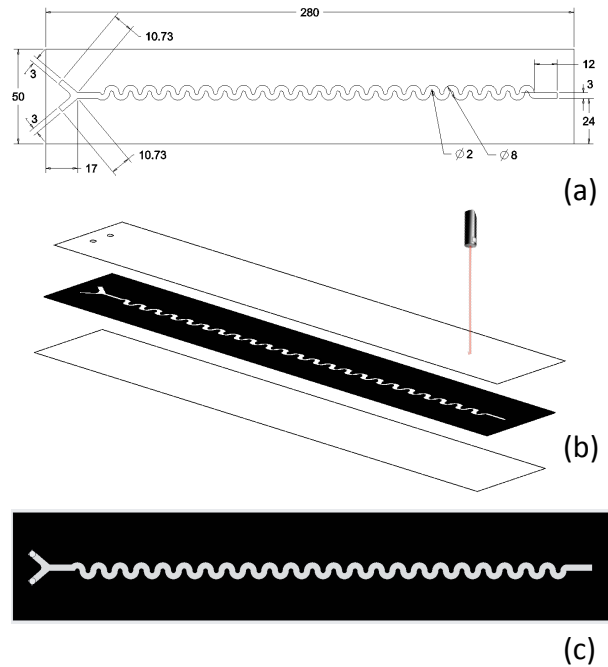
Schematic of the test section: (a) dimensions of the serpentine channel (in mm); (b) schematic of the laser welding process; (c) assembled test section
